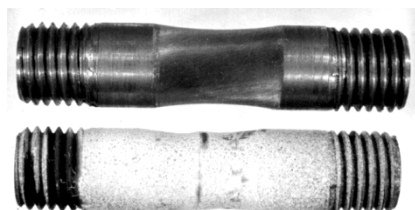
Testing specimen for the thermal fatigue initial state and cracked after testing.
